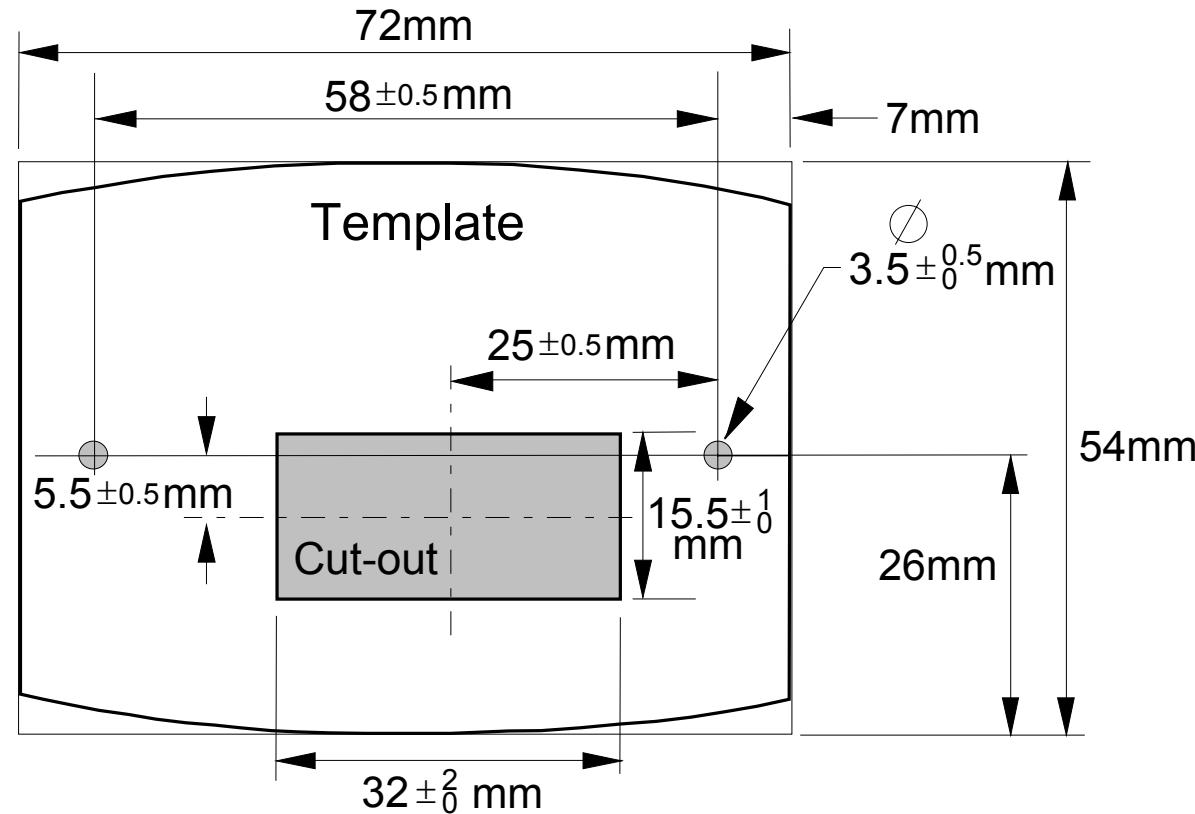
Mounting Dimensions for the Remote-Mounted 6511 Keypad
